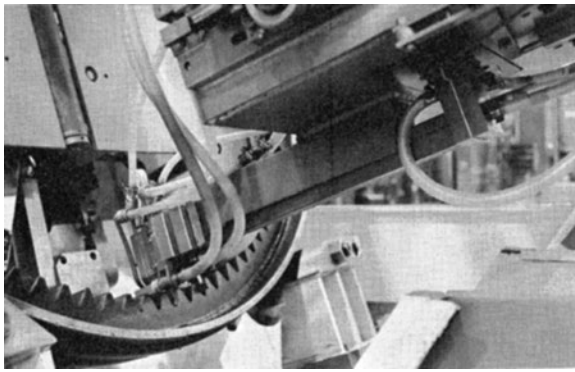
Close-up view of scanning mechanism on a large induction-hardening machine. Note round guide pin, inductor, electric power cables, coolant lines, and traversing ram. (Courtesy of National Automatic Tool Co., Inc., Richmond, Indiana.)
